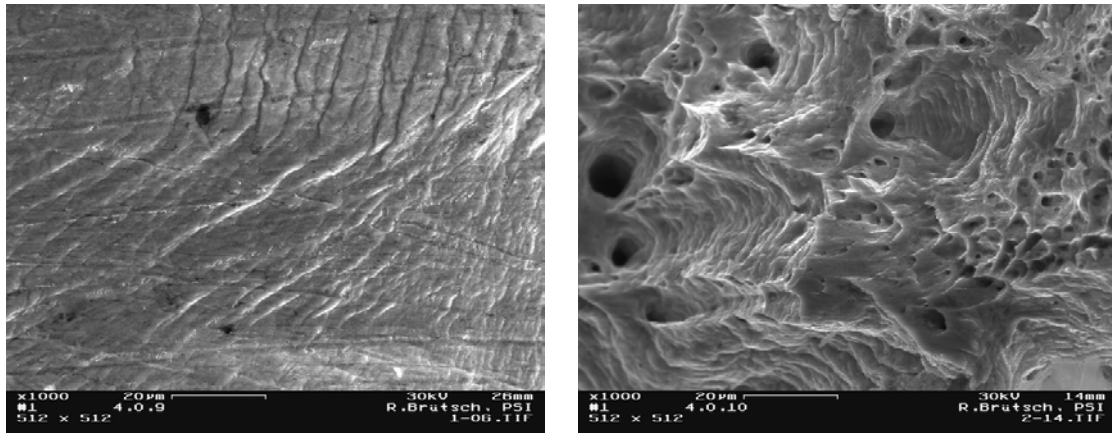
SEM images of fracture surface of the AISI 304 BM tensile tested up to fracture at 293 K.
